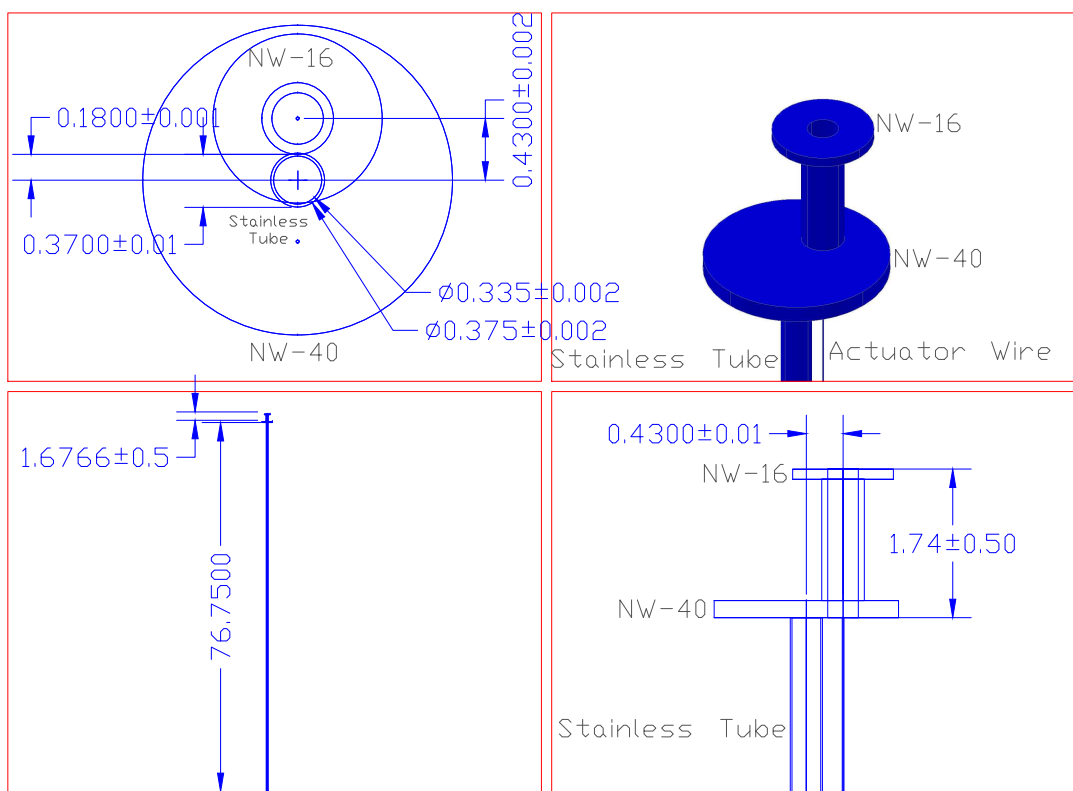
Schematics of the main stainless rod and NW-16 feedthrough attached to the top NW-40 flange which form the backbone of the rotator probe.
